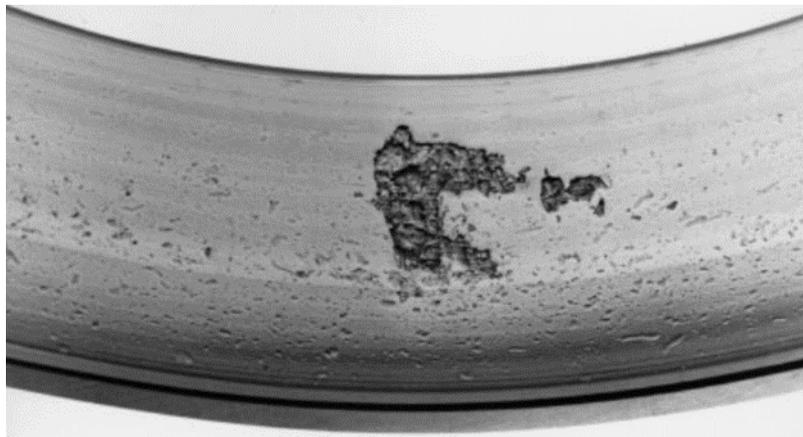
Fatigue damage in the outer ring raceway of a tapered roller bearing (Schaeffler Technologies, 2012).
